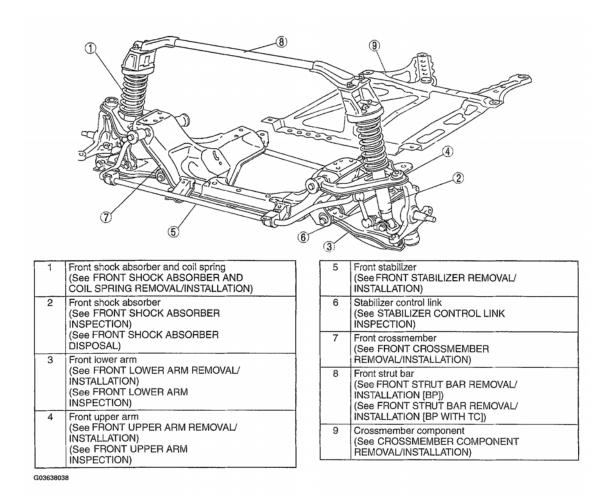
Identifying Front Suspension Location Courtesy of MAZDA MOTORS CORP.
